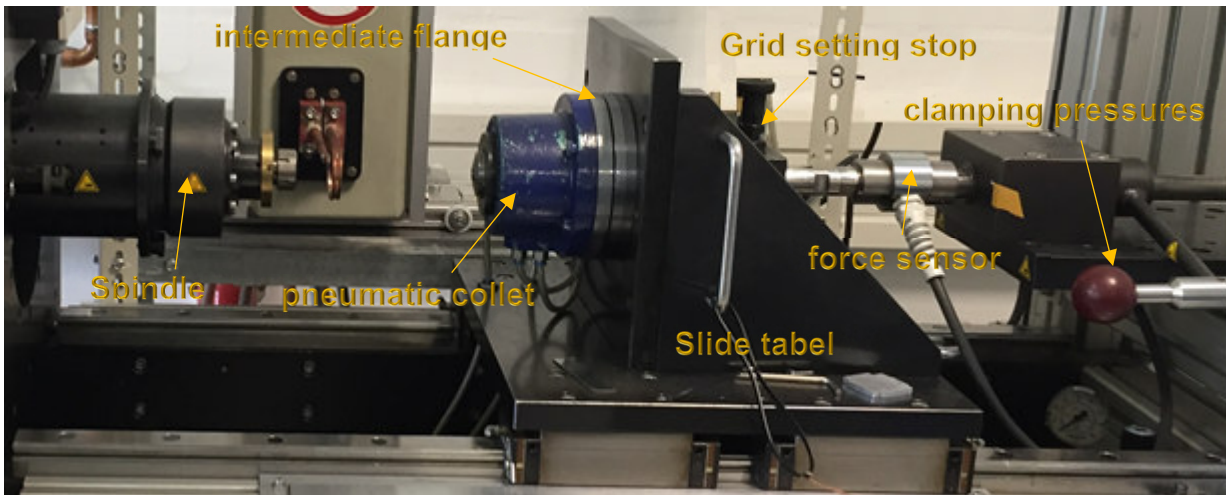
The used rotary friction welding machine RSM 200.
